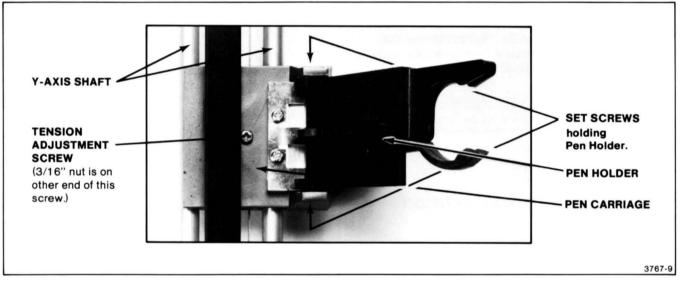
Pen Carriage Slide Tension Adjustment.
